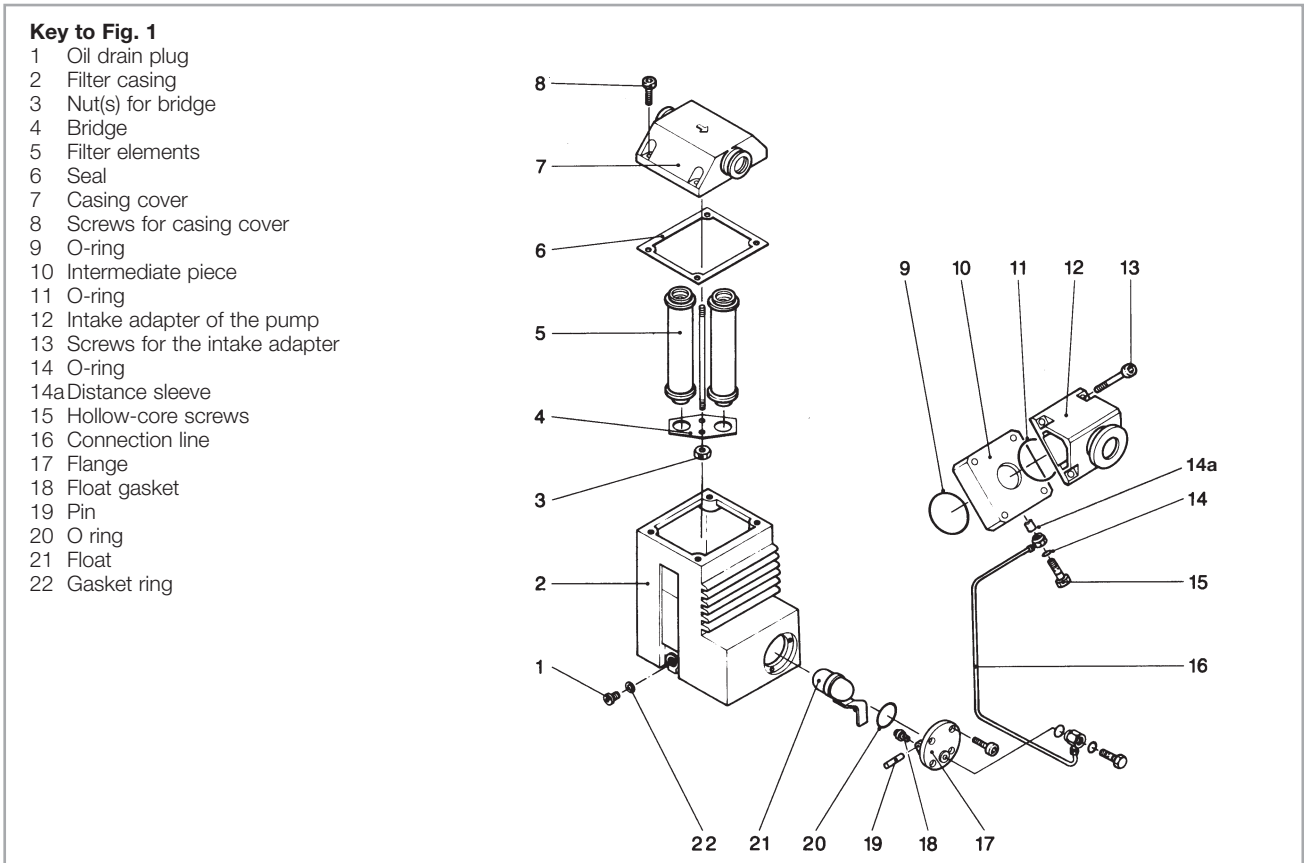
Exploded diagram of AR 40-65 (AR 4-8 and AR 16-25 are similar)
